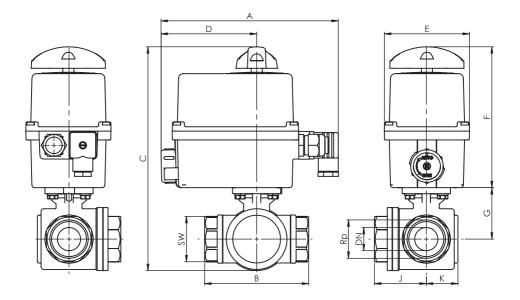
Dimensional drawing Type EKT (exemplary representation with ER Plus rotary actuator)
